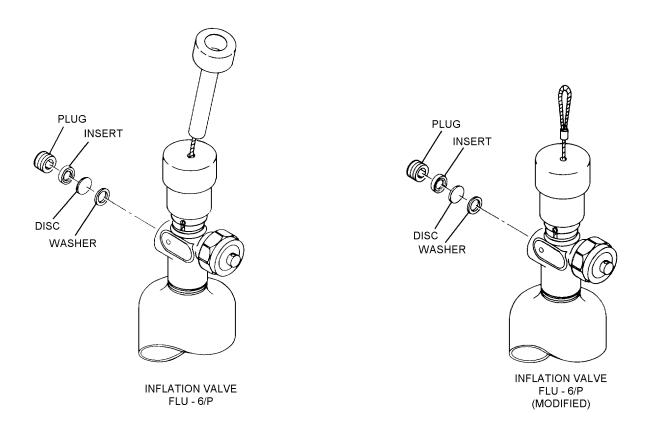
Disassembly of Inflation Valve Safety Disc Assembly
